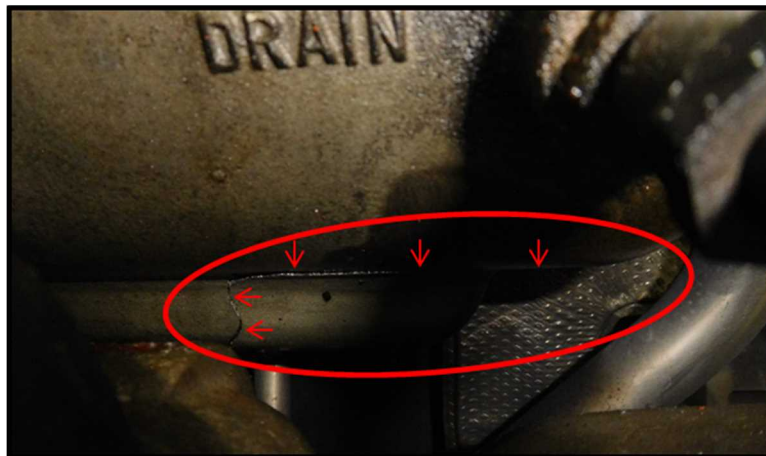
Cracks on the Fuel Oil Heat Exchanger
